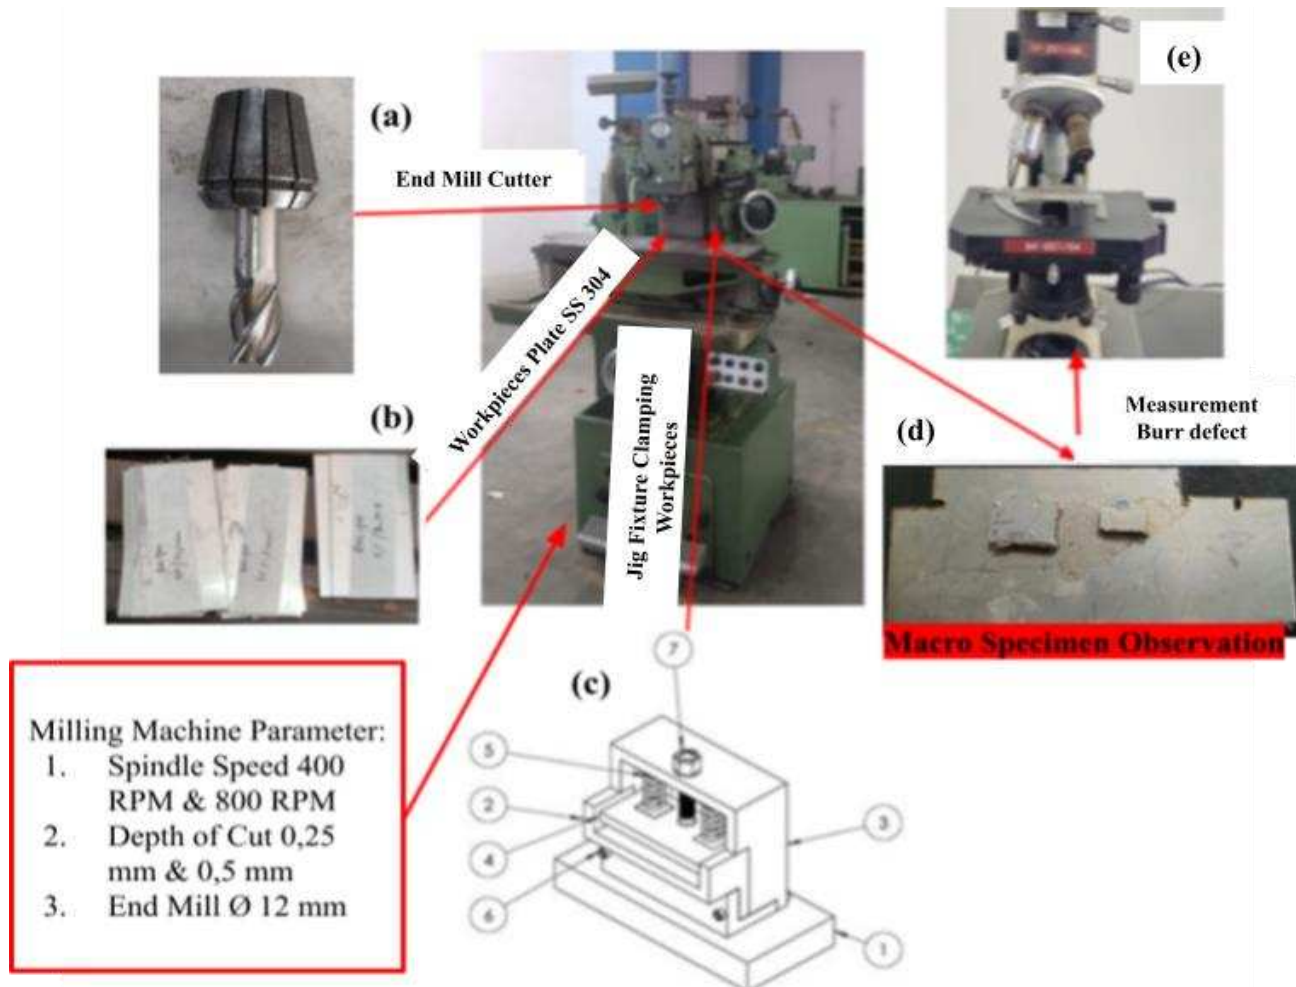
Experimental setup of the conventional milling process. (a) End mill cutter 12 mm, (b) plate SS 304, (c) jig fixture, (d) specimen macro observation, (e) optical microscope.
